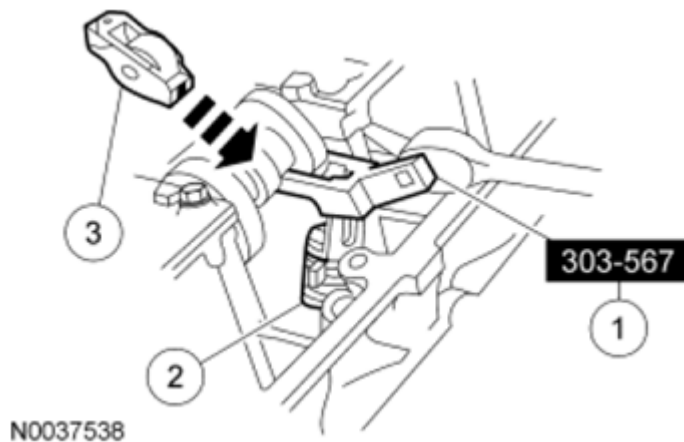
Locating Hydraulic Lash Adjusters
